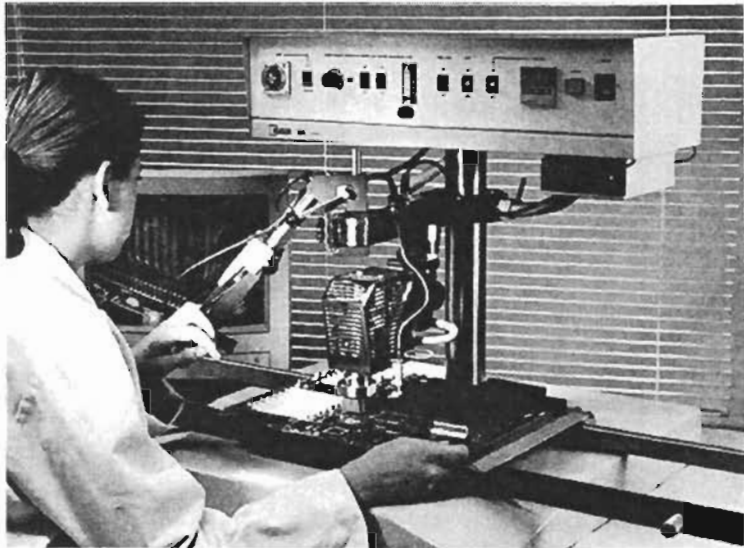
Hot gas/air soldering machine, used typically in rework or individual component placement (Planer Industrial)
